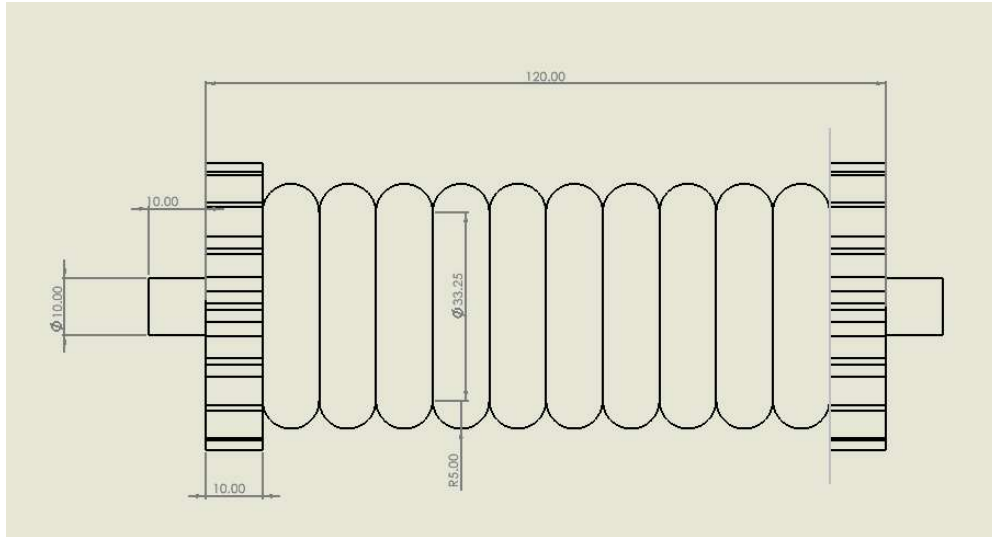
Dimensioned Right Side View of Roller With Vertical Bumps
